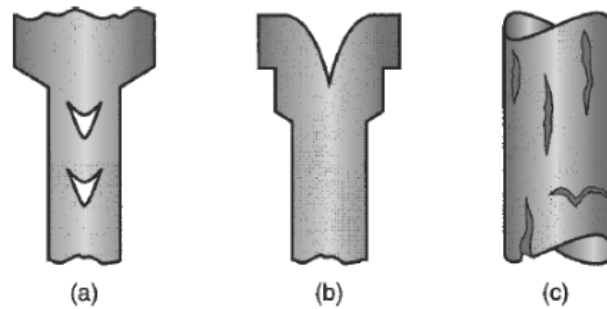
Images showing common extrusion defects (a)centre cracking; (b) piping; (c) surface cracking[29]
